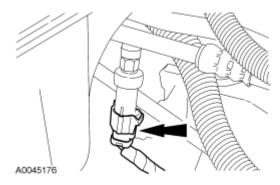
A/C Electrical Connector Courtesy of FORD MOTOR CO.
